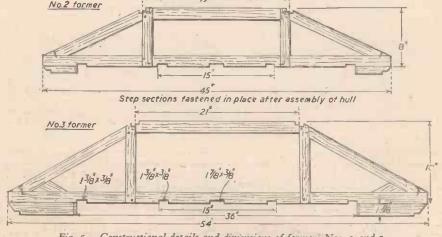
Constructional details and dimensions of formers Nos. 2 and 3.
